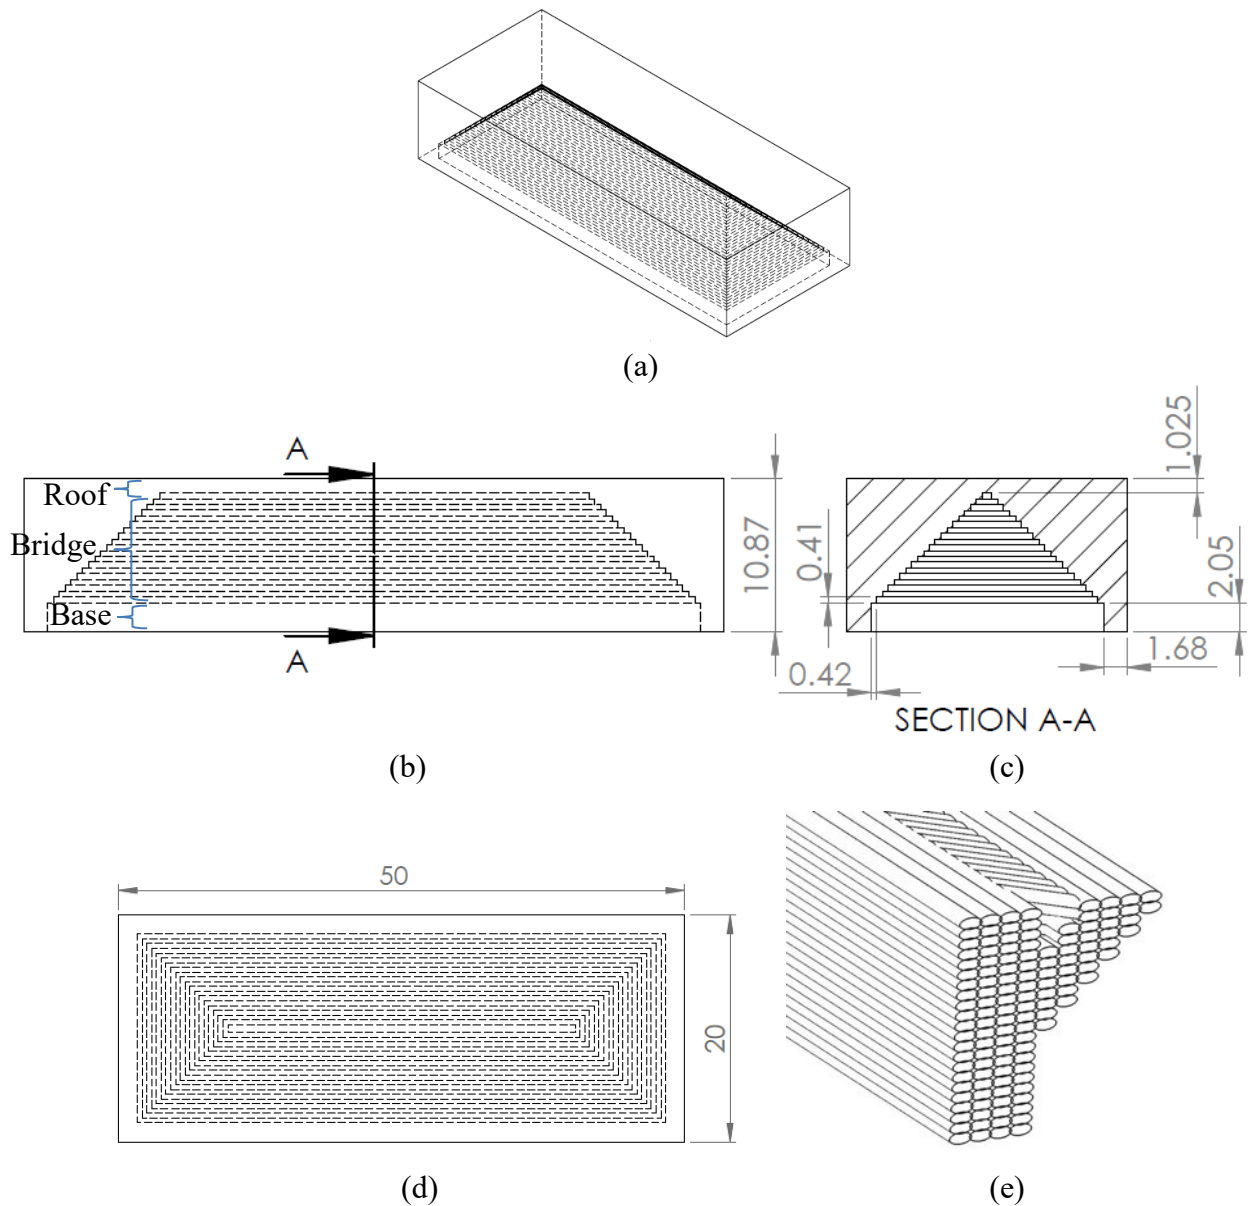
Bridging test specimen, with dimensions (unit: mm), for Test 5 part: (a) perspective view, (b) side view, (c) cross-section view of A-A, (d) top view, and (e) close-up view of the base and bridge.
